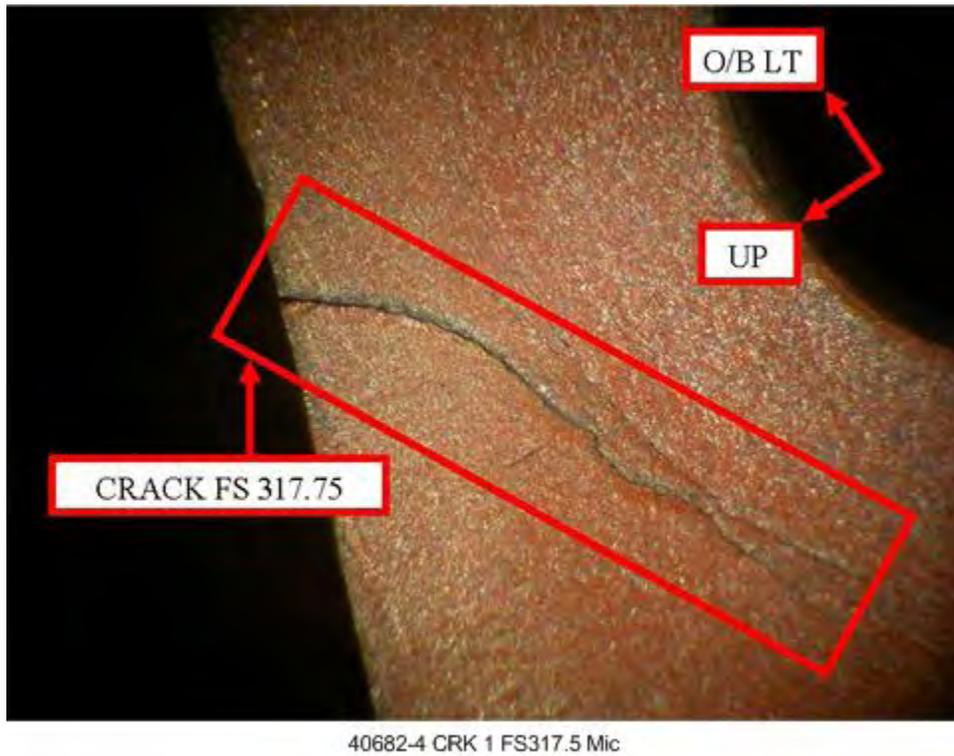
Microscopic View of a Crack Aft Fuselage Bulkhead Assembly FS 317.75
